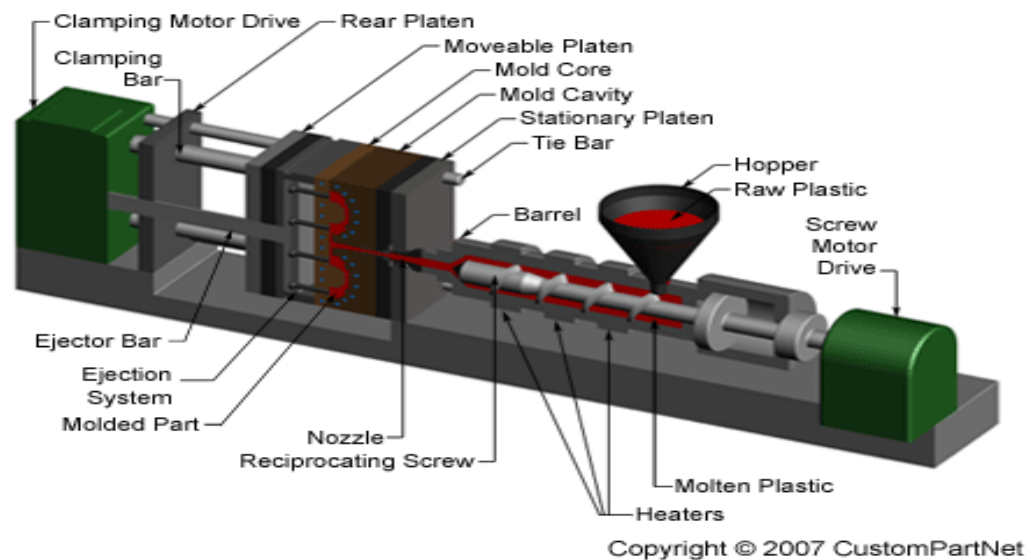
Schematic view of Injection molding machine and its parts [24]
